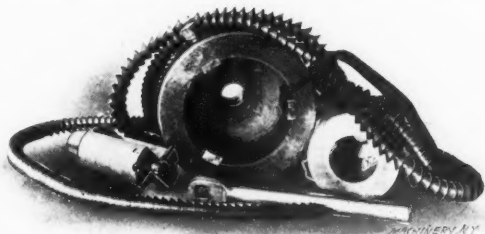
Three-bearing Chuck, Boring Head, Work, and Chip Produced.
